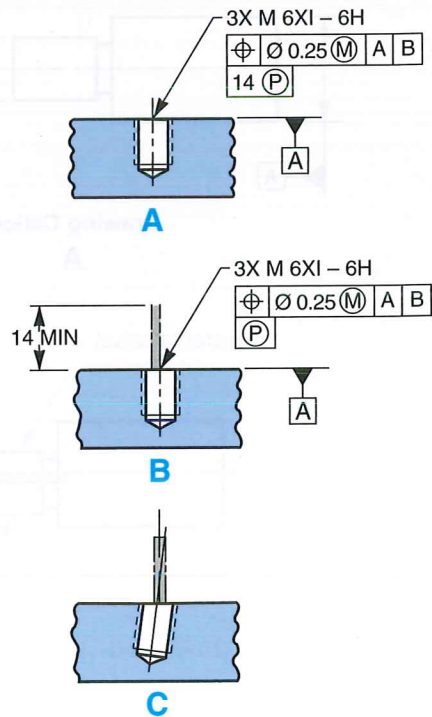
A projected tolerance zone indicates the distance above the surface of the part that is critical to a mating feature. A—The projected tolerance zone is indicated using a feature control frame. B—The projected tolerance zone can also be indicated using a combination of a feature control frame and a chain dimension. C—The interpretation of the tolerances specified in A and B. (American Society of Mechanical Engineers)
